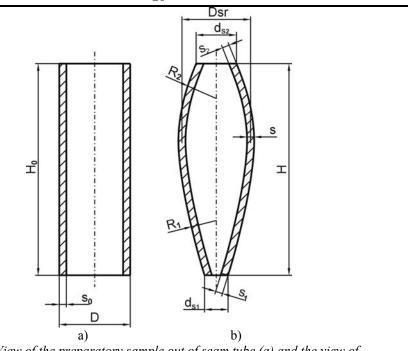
View of the preparatory sample out of seam tube (a) and the view of axial-symmetrical work-piece (b)
